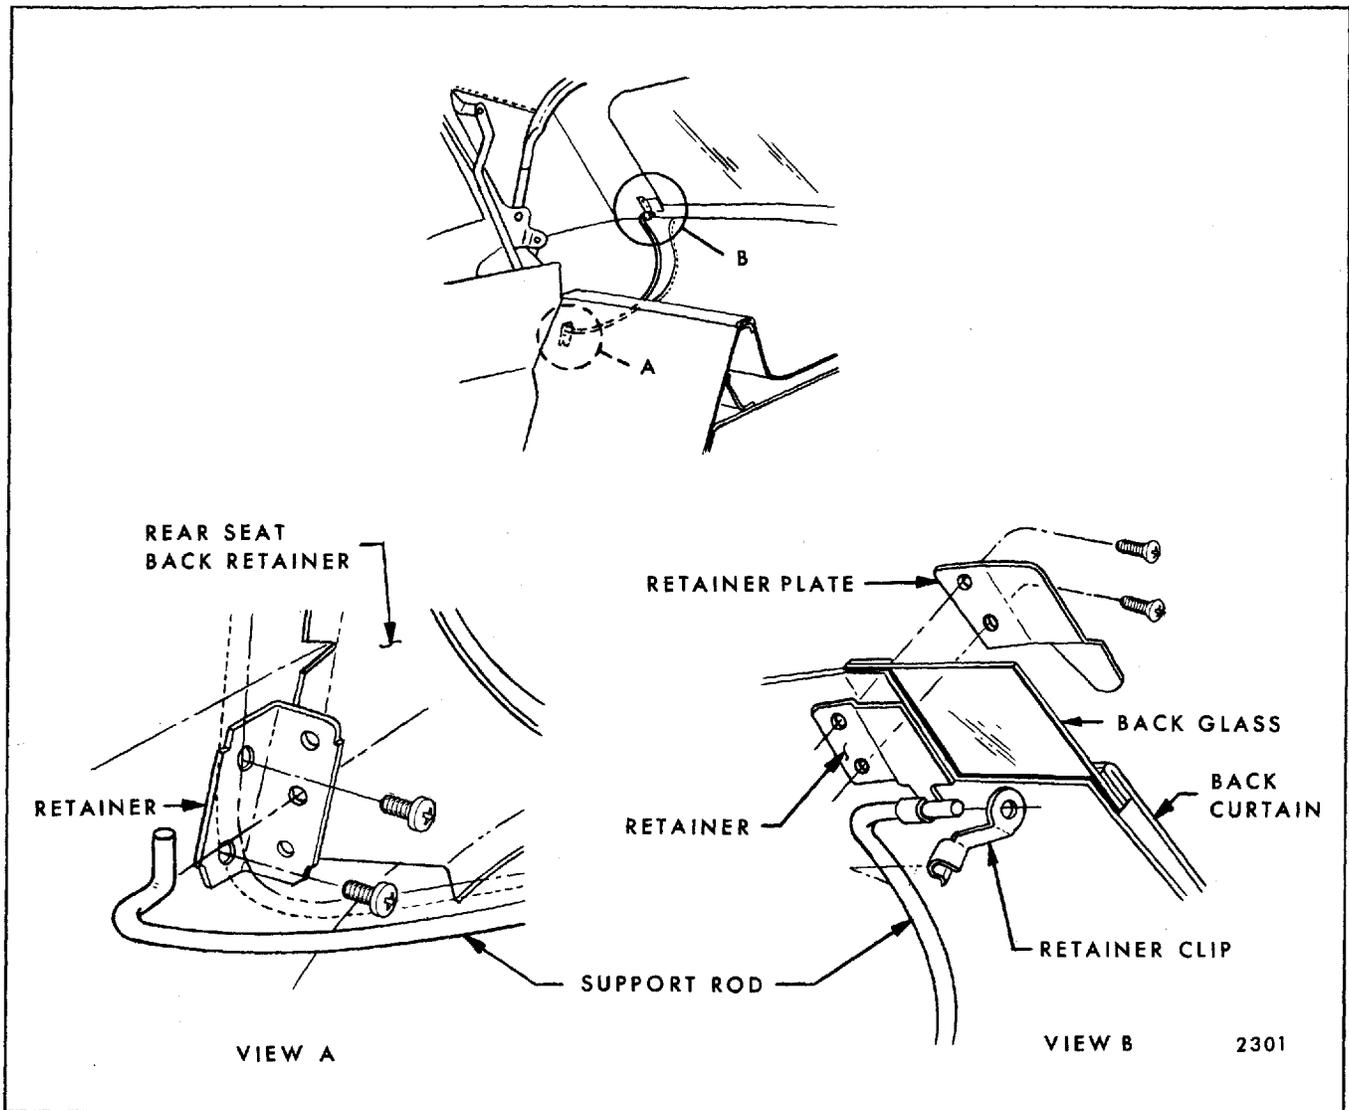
"B & C" Body Back Glass Support Rod Attachments
